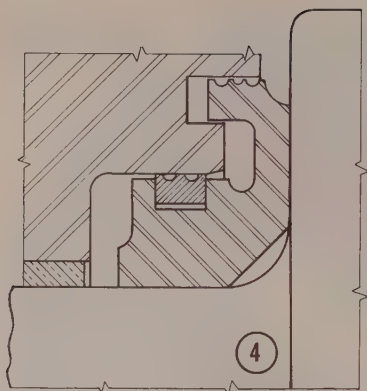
Oil pressurized plain bearing with piston ring sealing arrangement
